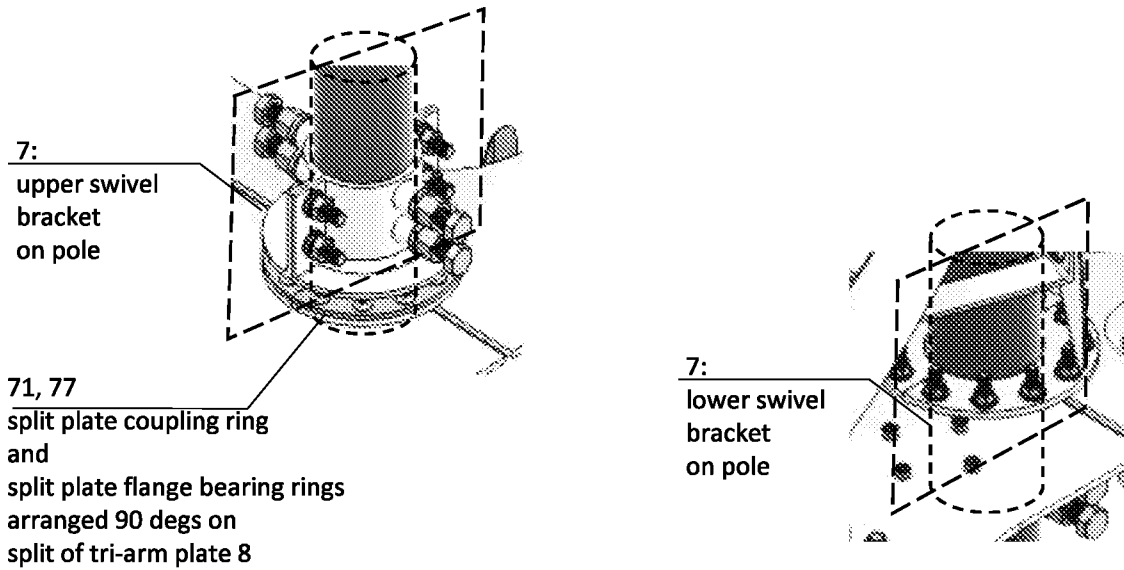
C: assembled upper and lower split swivel clamps with joined tri-arms assembled onto, isometric view with section plane for Fig. 7B,
